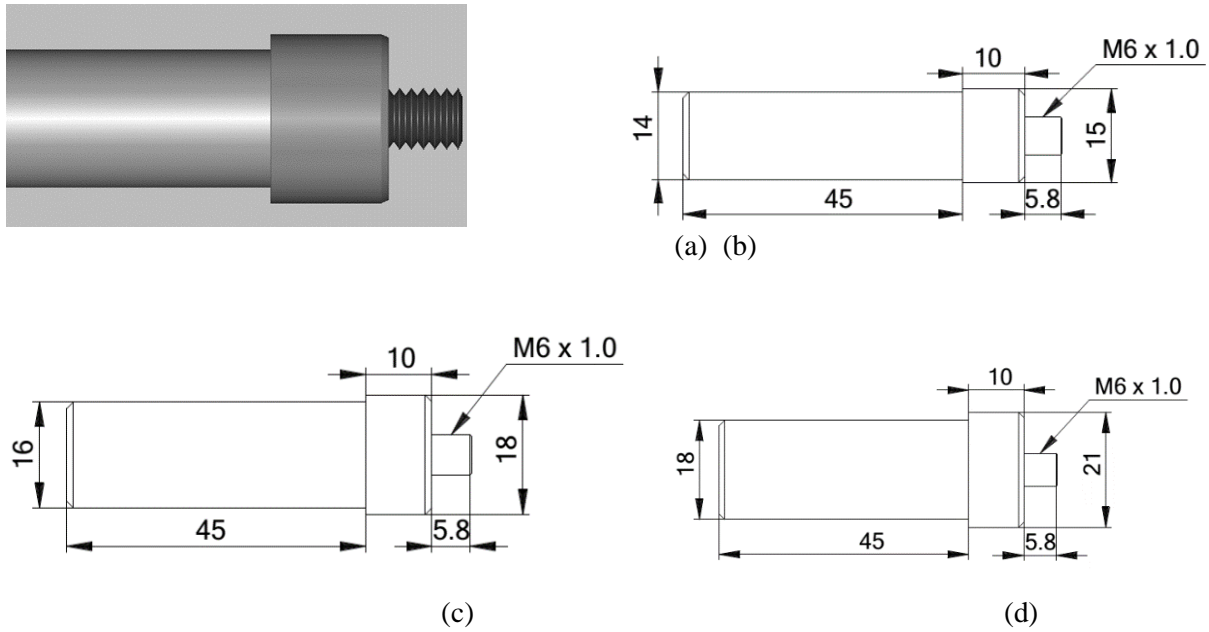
FSW threaded cylindrical tool profiles (a) pictorial view (b), (c) and (d) tools for pin diameter to shoulder diameter ratios 2.5, 3.0 and 3.5 respectively.
